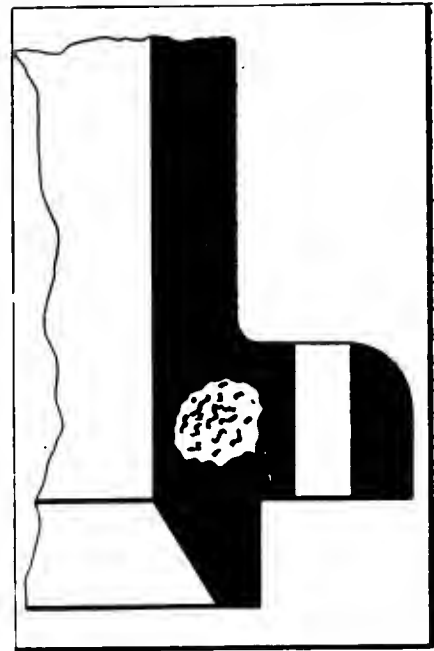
Shrink hole in section of bolting lug, following presence of excess metal
